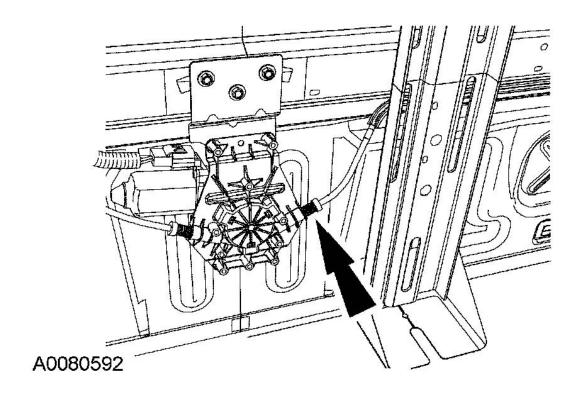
Compressing And Hold Cable Tension Spring Courtesy of FORD MOTOR CO.
